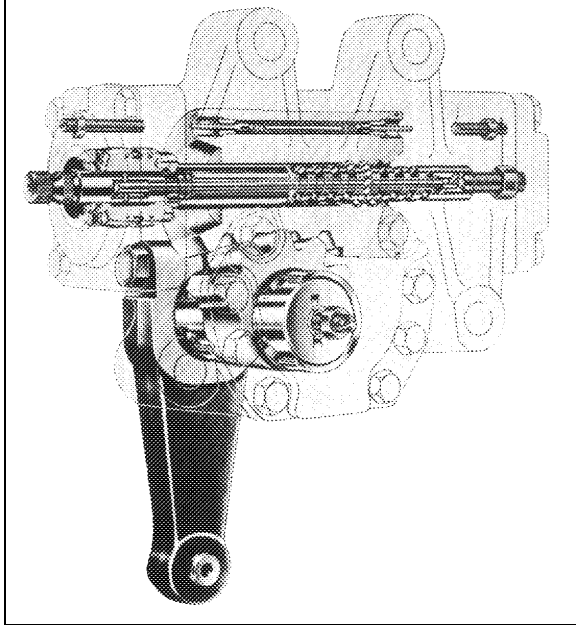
INTEGRAL POWER STEERING GEAR 14013
